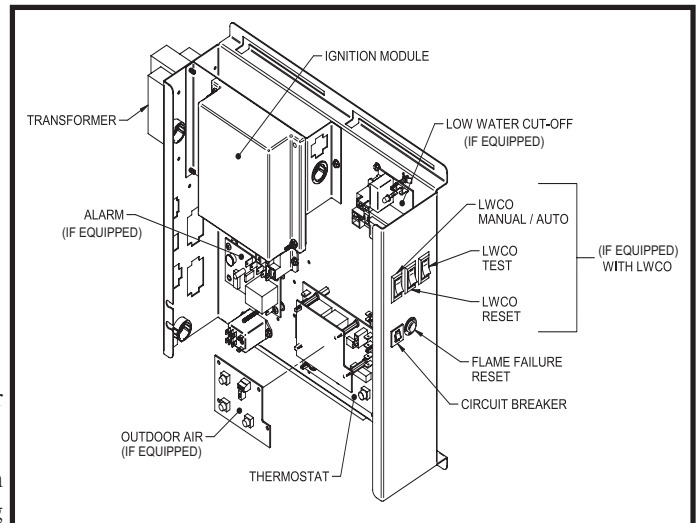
F9 Slide Out Control Panel Opened to Show Component Locations
